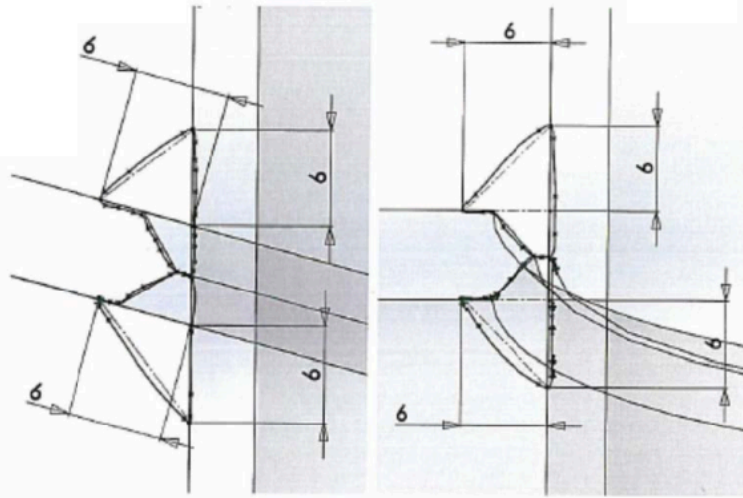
Equal 6mm fillet welds superimposed on complete penetration bevel welds. The left figure shows the weld interface at the leading edge of the blades, and the right figure shows the weld interface at the mid blade section.
